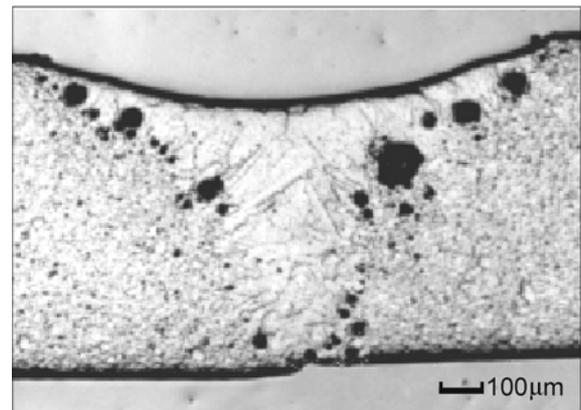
SEM- view of the laser welded surface of the welded seam.
